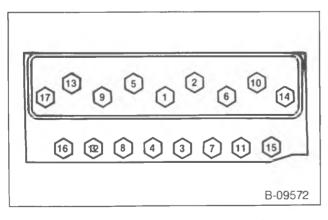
Cylinder Head Bolt Tightening Sequence (5.0L and 5.7L Engines)
